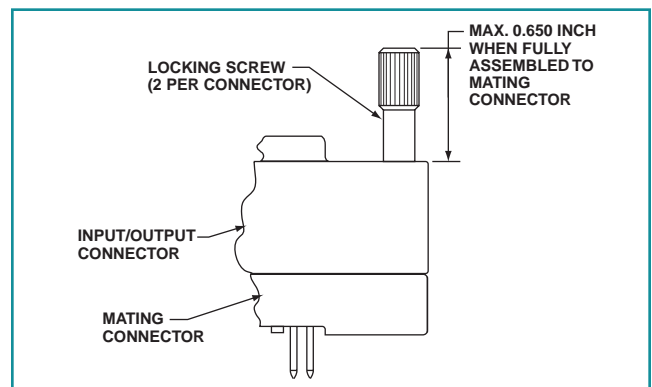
I/O LOCKING SCREW DIMENSIONS
